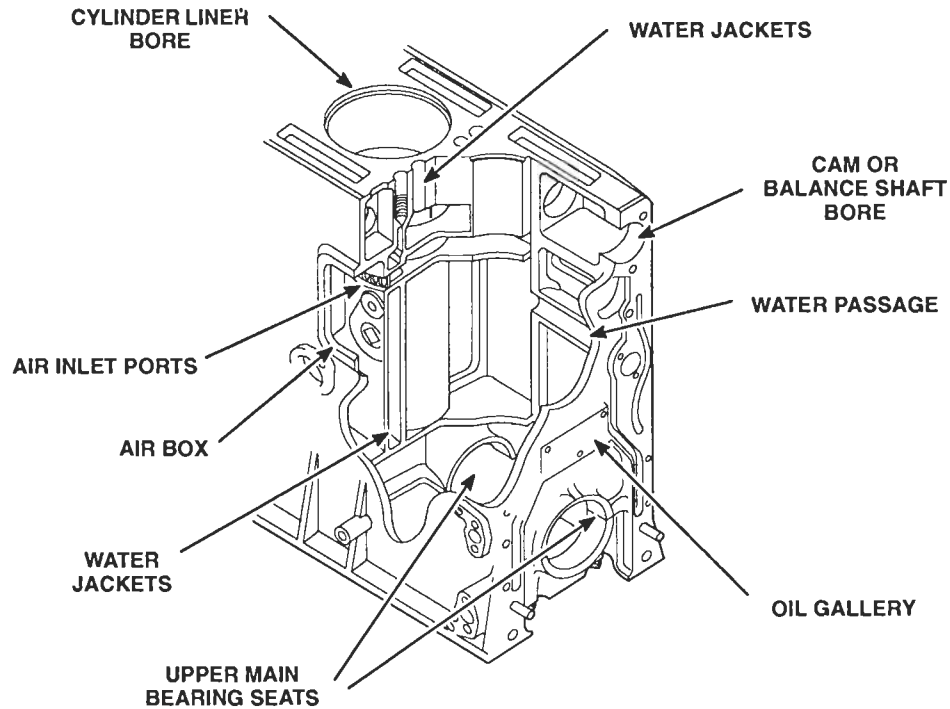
Cutaway View of Cylinder Block Showing Air and Water Passages
